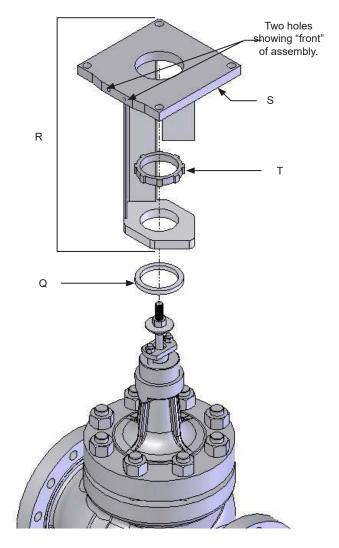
Placing Mounting Assembly onto Valve (Mounting Assembly cut-away to show Nut Holder)
